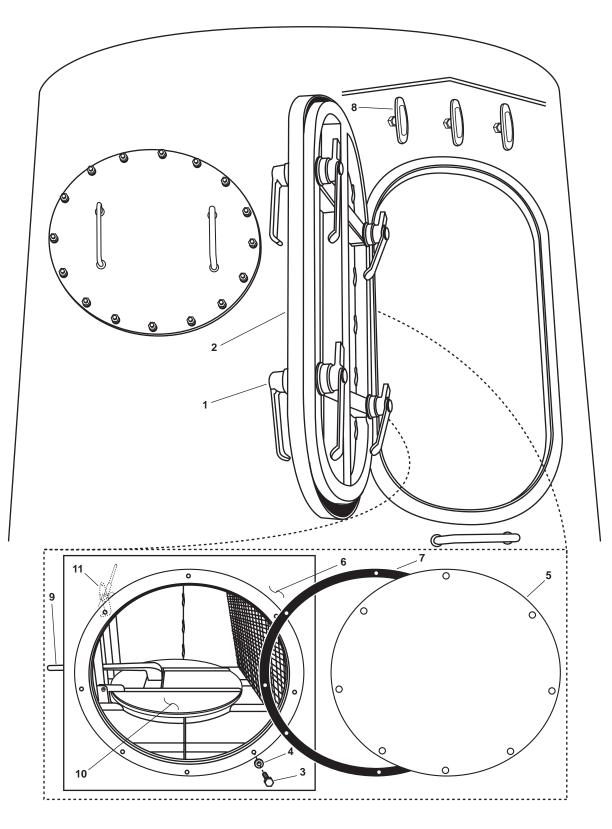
Access to Engine Room Ventilation Exhaust Assembly Fire Flap
